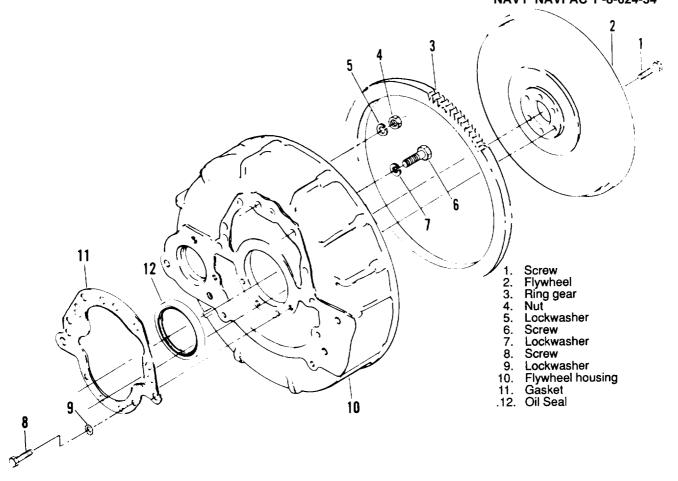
Flywheel and Flywheel Housing, Exploded View
